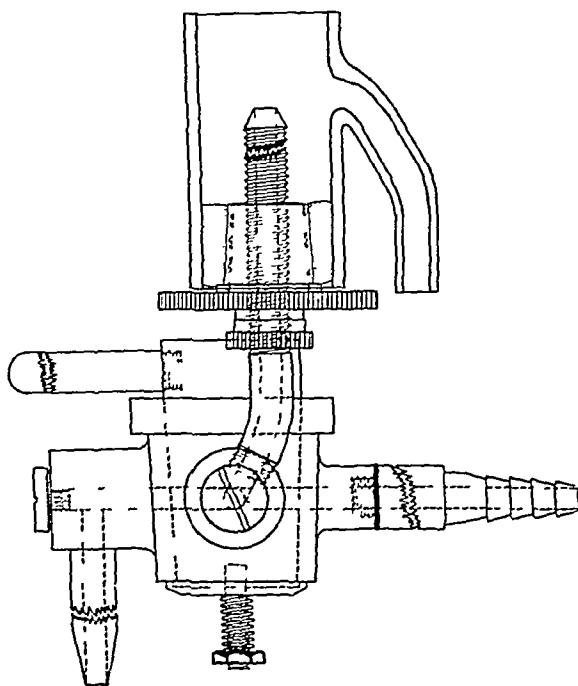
Side view of test tube filler showing details of construction of the spring tension device.
